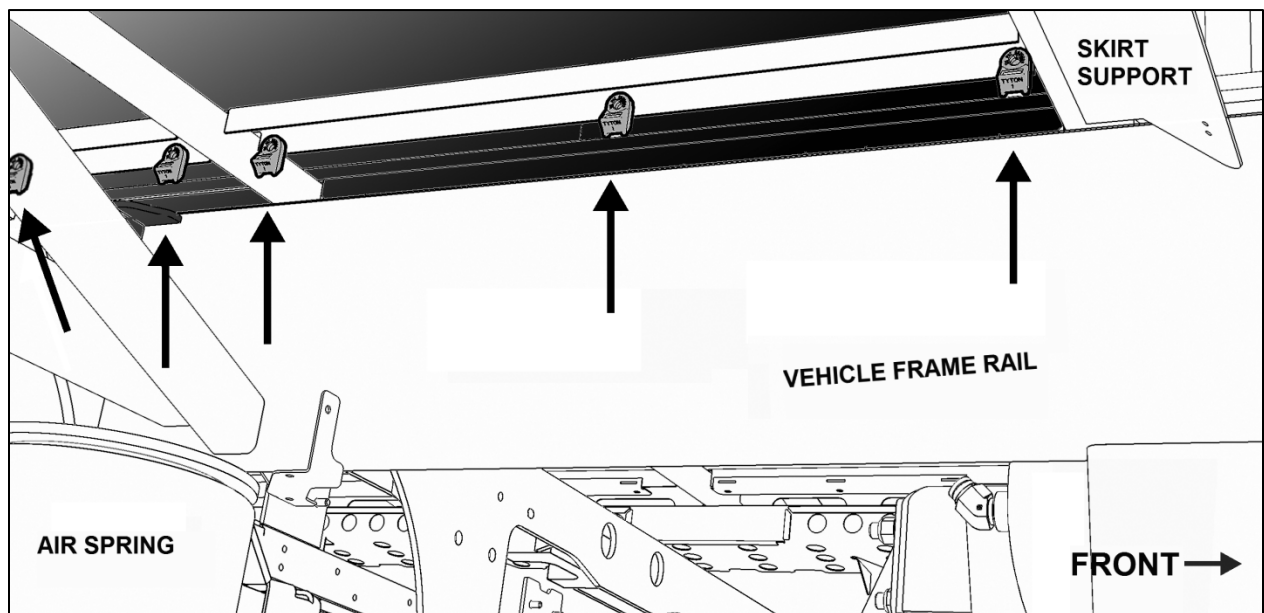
507383 CABLE TIE SUPPORTS MAY BE INSTALLED WITH RIVETS OR SCREWS.
